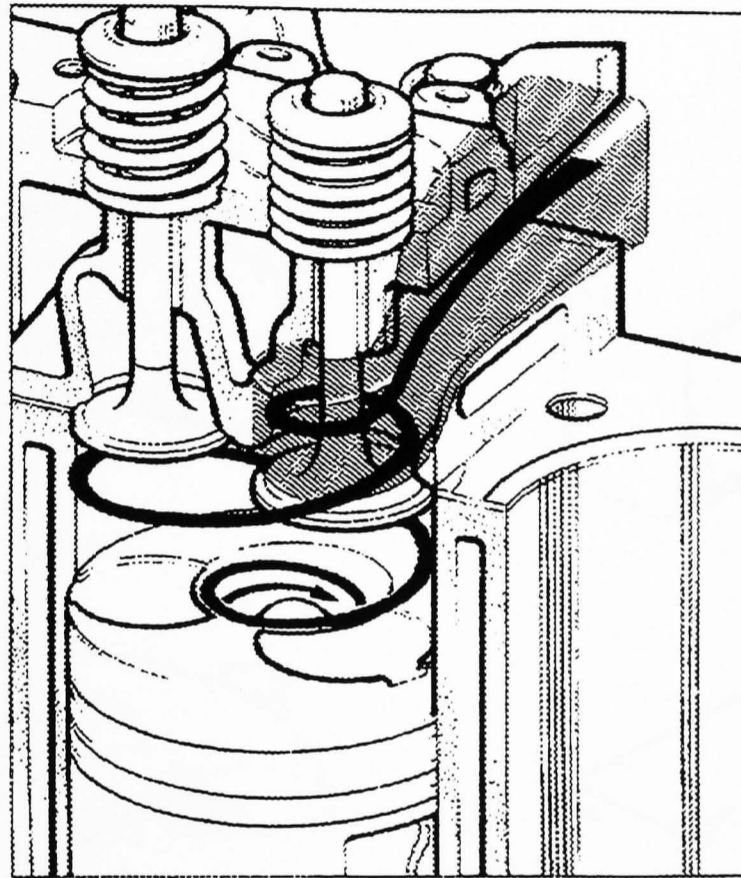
Swirl generation using a helical port design in the Ford 2.5ltr DI Diesel engine [Stone, 1992].
